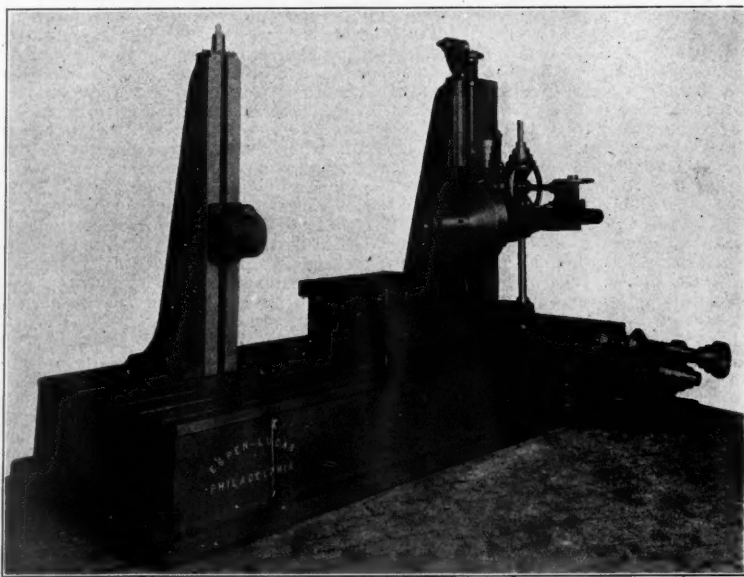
The Espen-Lucas Horizontal Boring, Milling and Drilling Machine.
